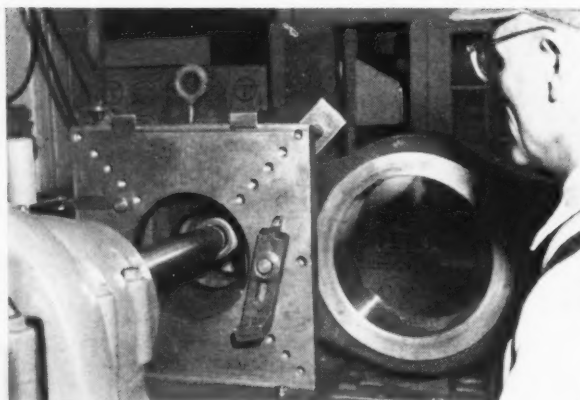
Grinding  $6\frac{7}{8}$ " I.D. knuckle pin holes in a locomotive connecting rod using shop-made gage and taper attachments ( $1\frac{1}{2}$ " taper in 12"). Machine is a Heald internal grinder using Carborundum tooling. A mirror attachment enables operator to see far side of the work.
